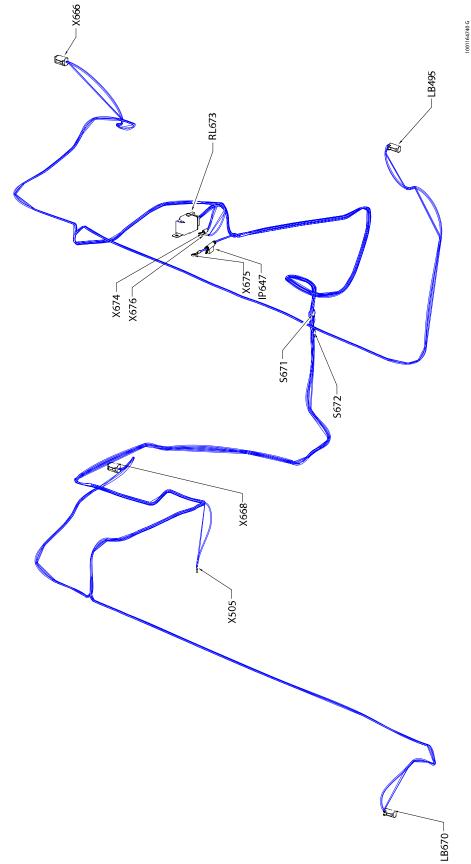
Chassis Head and Tail Lights Harness - Sheet 5 of 5
